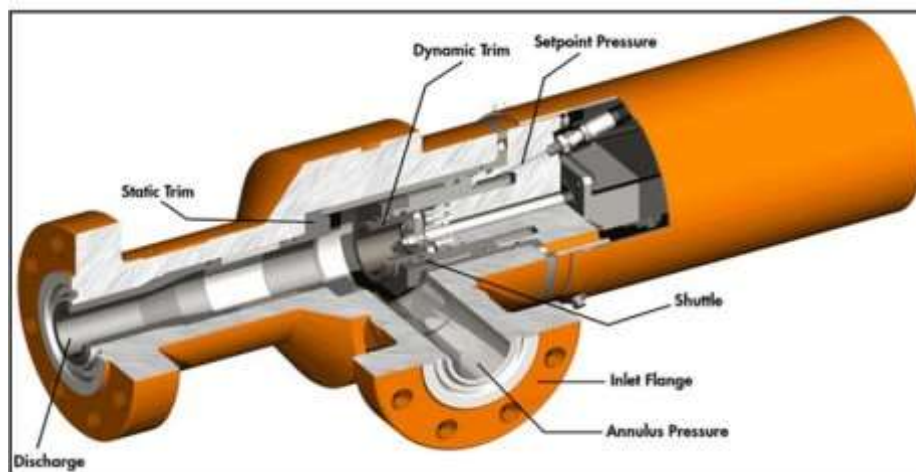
CHOKE VALVE STRUCTURE [34]
